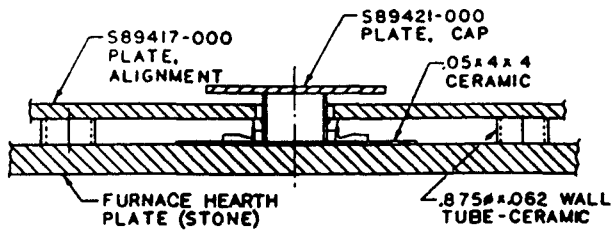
(HEADER ASSEMBLY FOR BRAZING)
